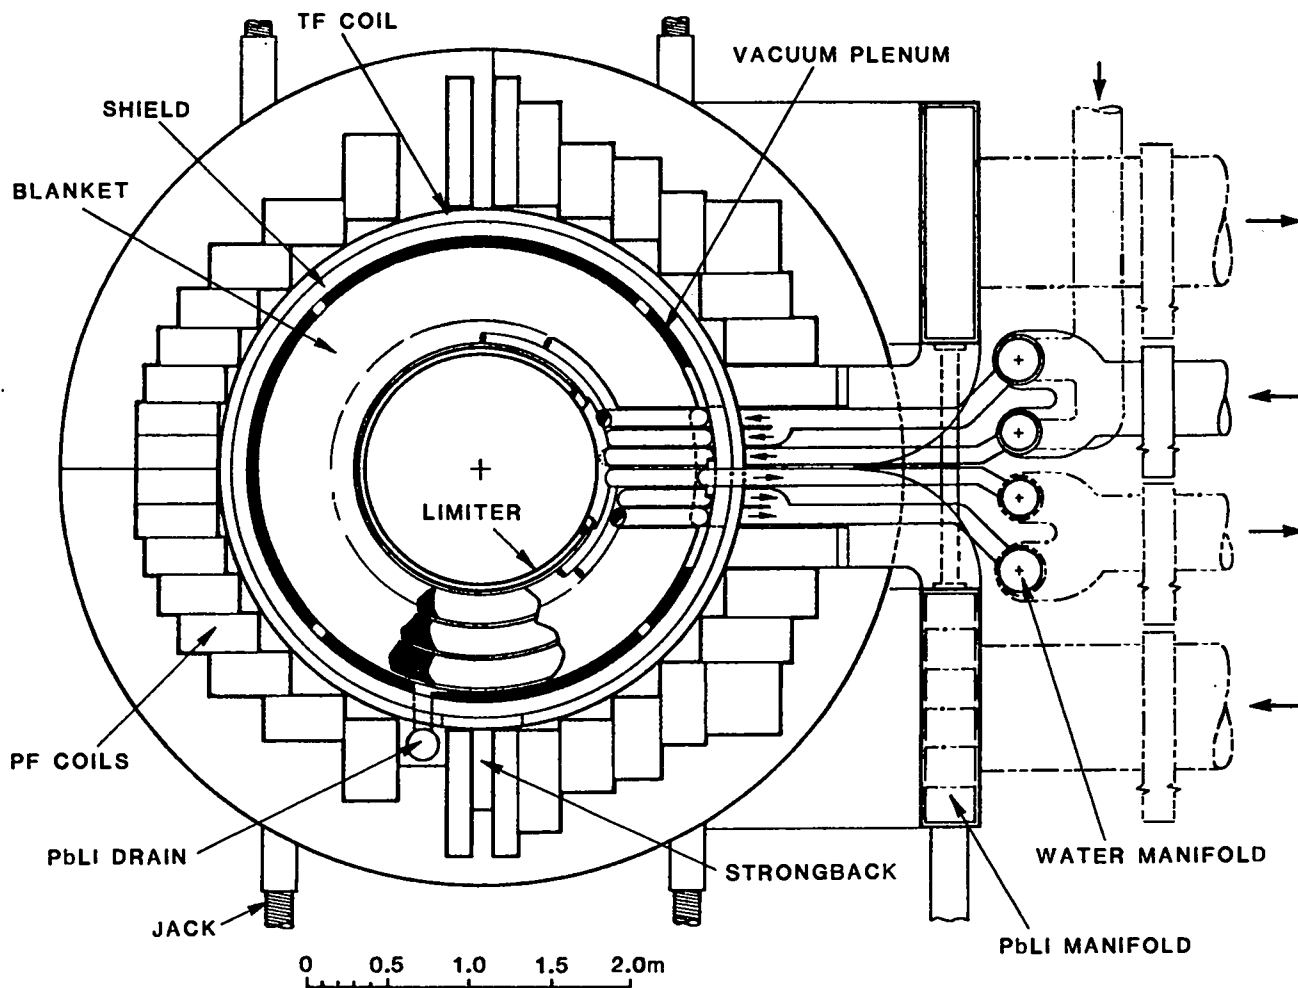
Cross-sectional view of FPC showing coolant manifold layout.
